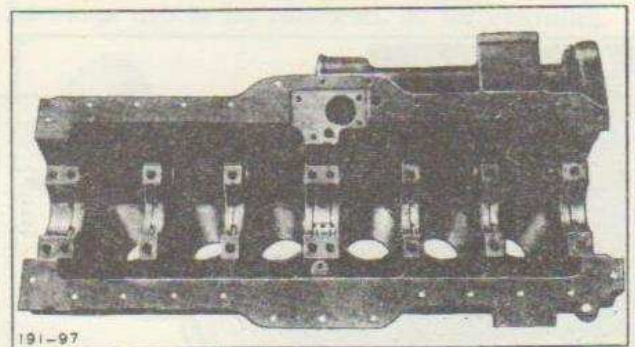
View into Upper Crankcase With Engine Block Stripped
